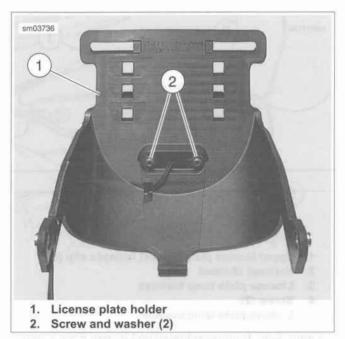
License Plate Holder and Lamp Mounting Screws: XL 883N, XL 1200X/V (HDI)
